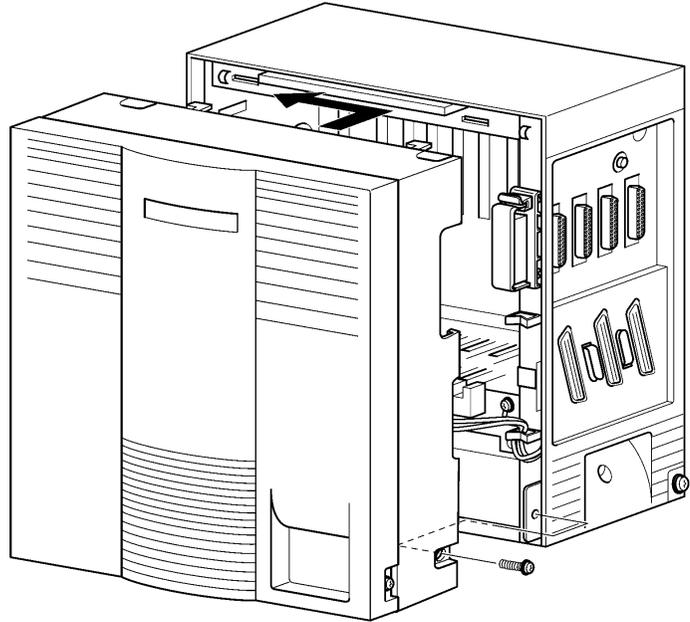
Attaching the Front Cover and the Front Cover Extender to the KSU
